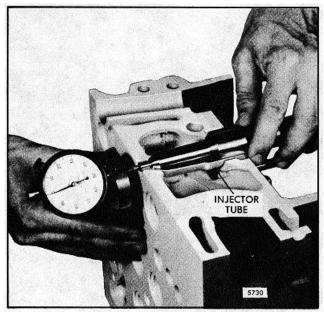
Measuring Relationship of Bevel Seat of Injector Tube to Fire Deck of Cylinder Head
